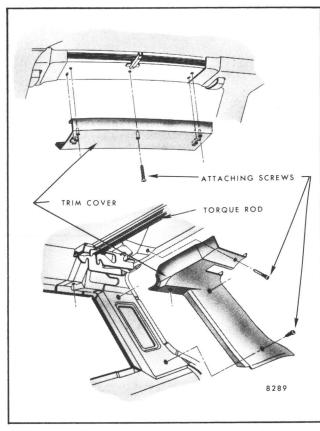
Torque Rod Trim Removal - "H-15" Styles
